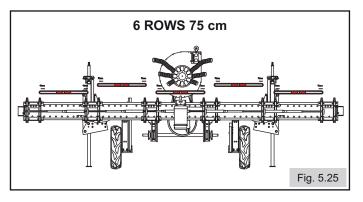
5.24 - 5.25 how how you can transform a machine configured to sow on 6 rows 45 into a machine sowing on 6 file 60 or 6 file 75.
